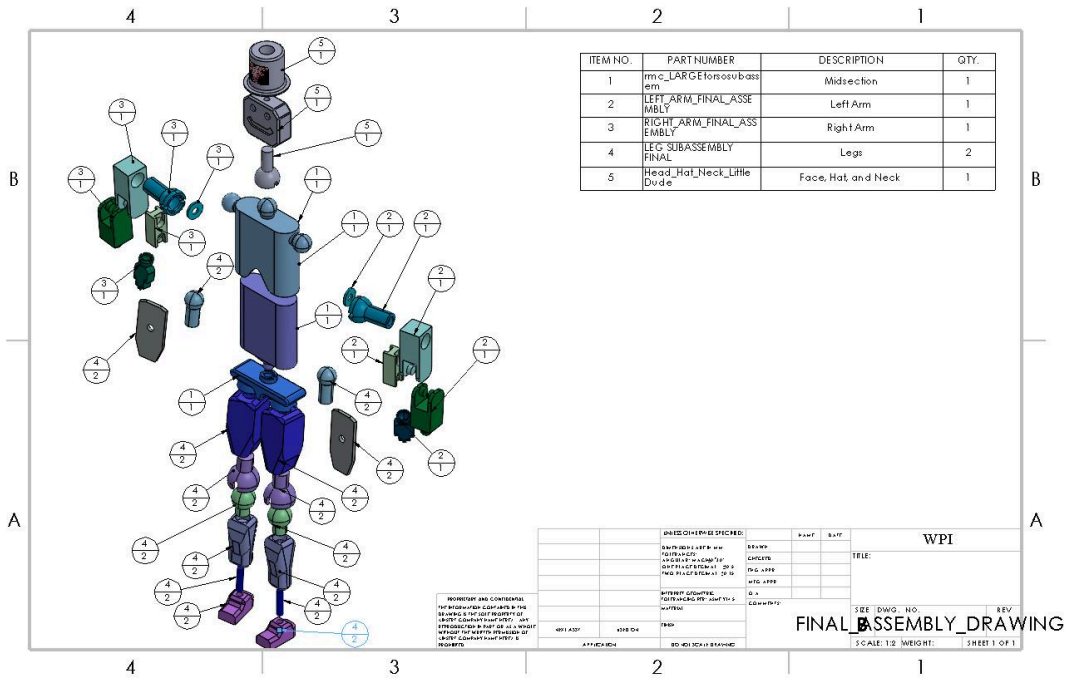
Little Man Jr. Isometric Exploded View Drawing
